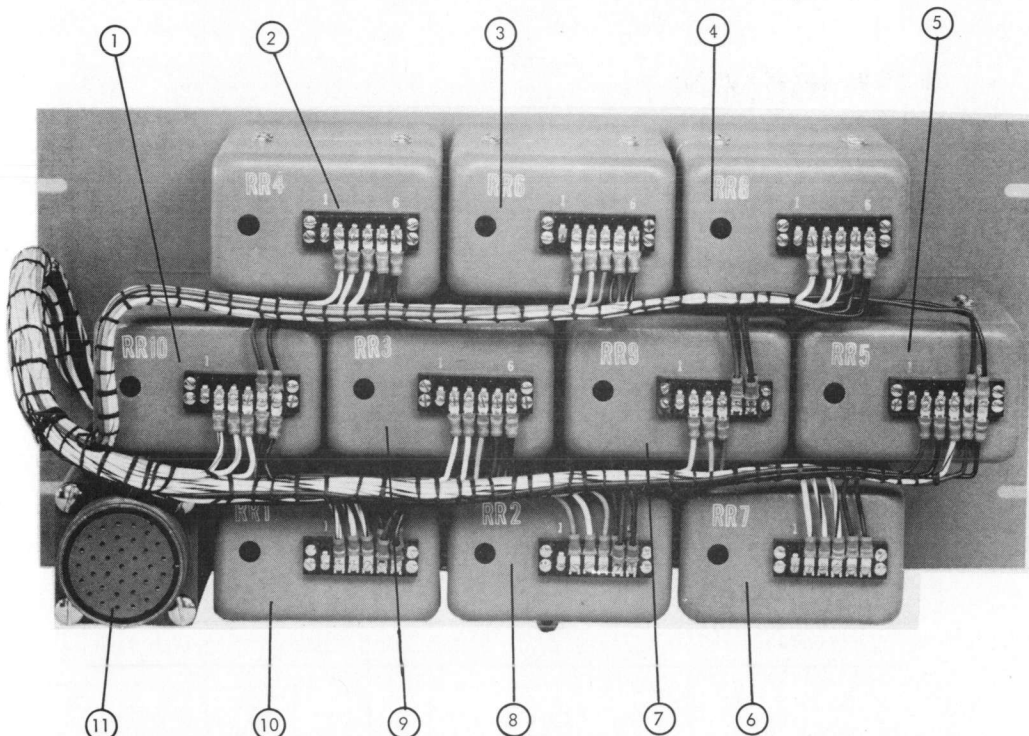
Remote Readout Panel for ATMC-1 Multicoupler (Rear View)
